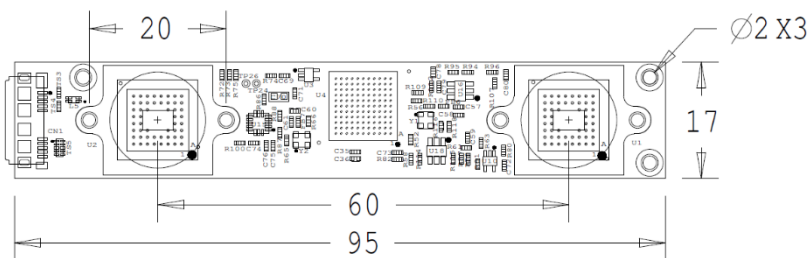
Front Assembly of TaraXL Board with Mechanical Dimensions
